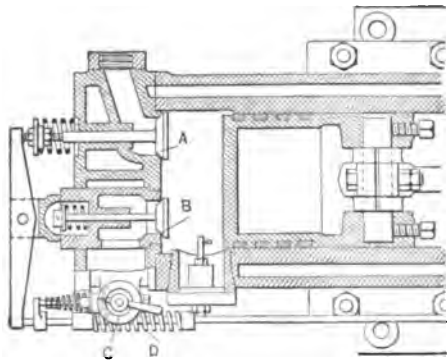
Cross-section of cylinder and valves of the Wayne engine.
